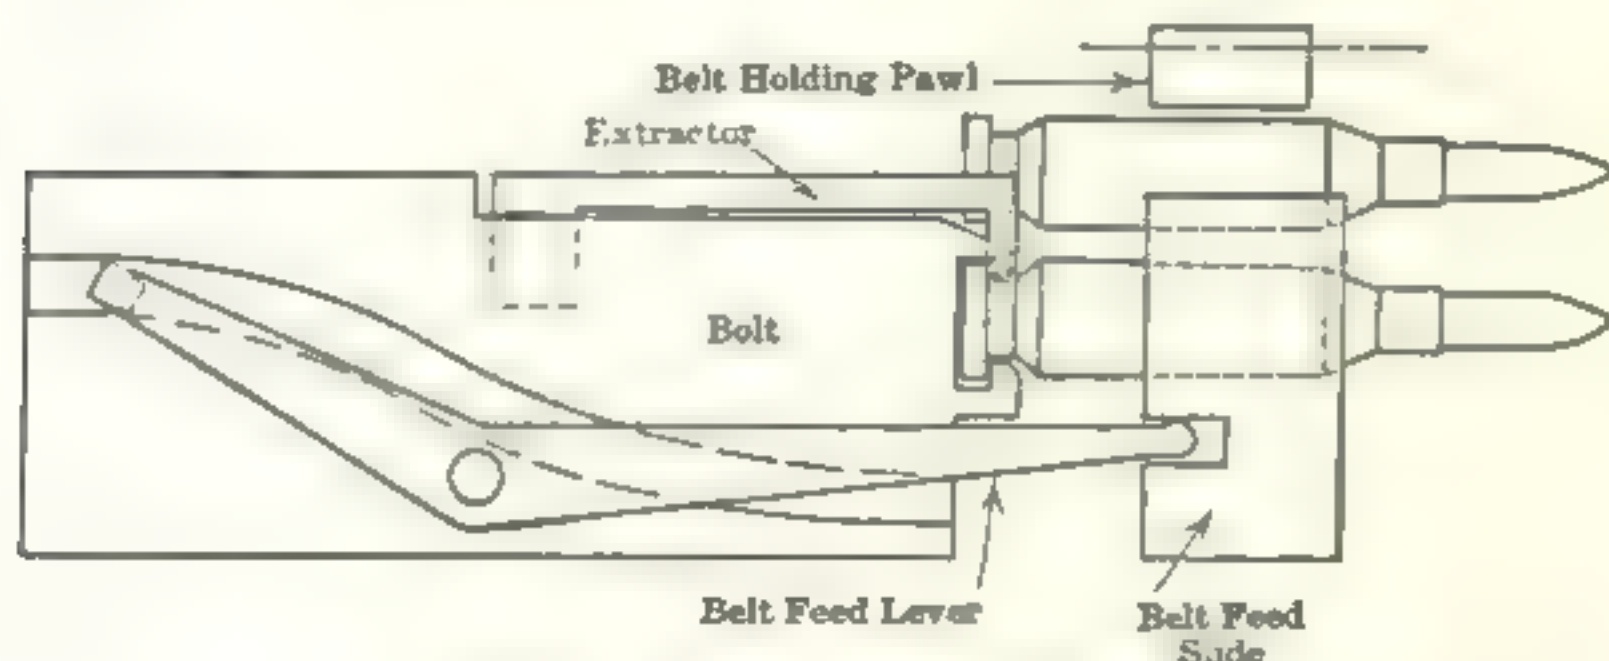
Browning Machine Gun—Belt Moving Chain.
